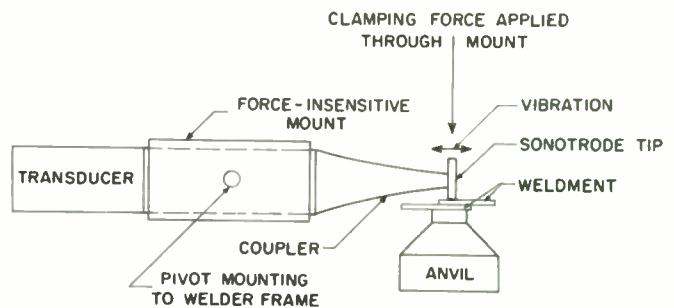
Lateral drive ultrasonic welding system.
